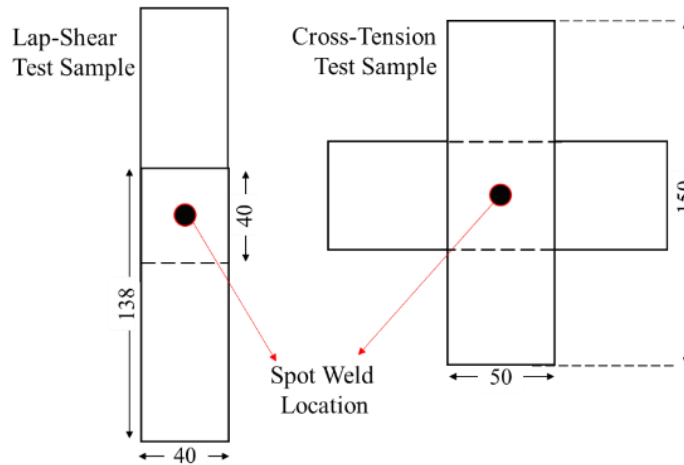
Lap-shear and cross-tension test sample geometries and dimension based on AWS D8.1 [23]. Dimensions are in mm.
